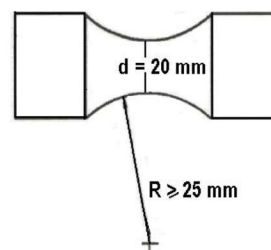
Tensile test specimen for grey cast iron
